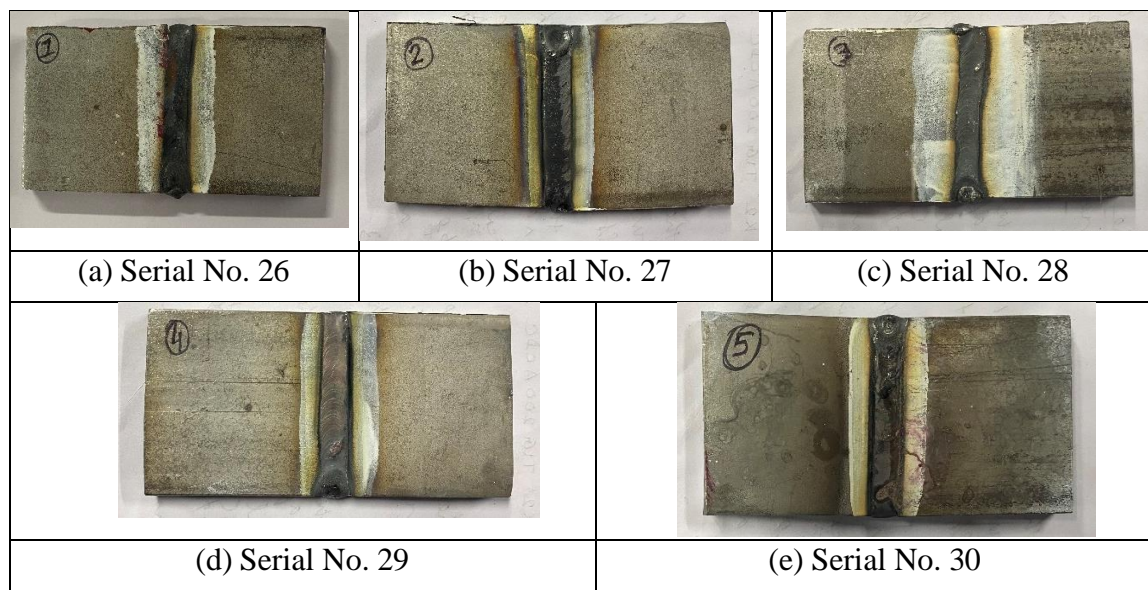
Top view of welded specimens of Experiment Set 3.
